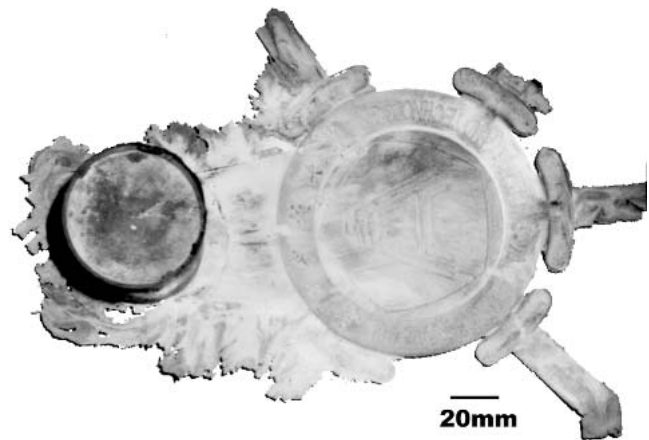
Casting with excessive tucks in a 72 MPa injection pressure
